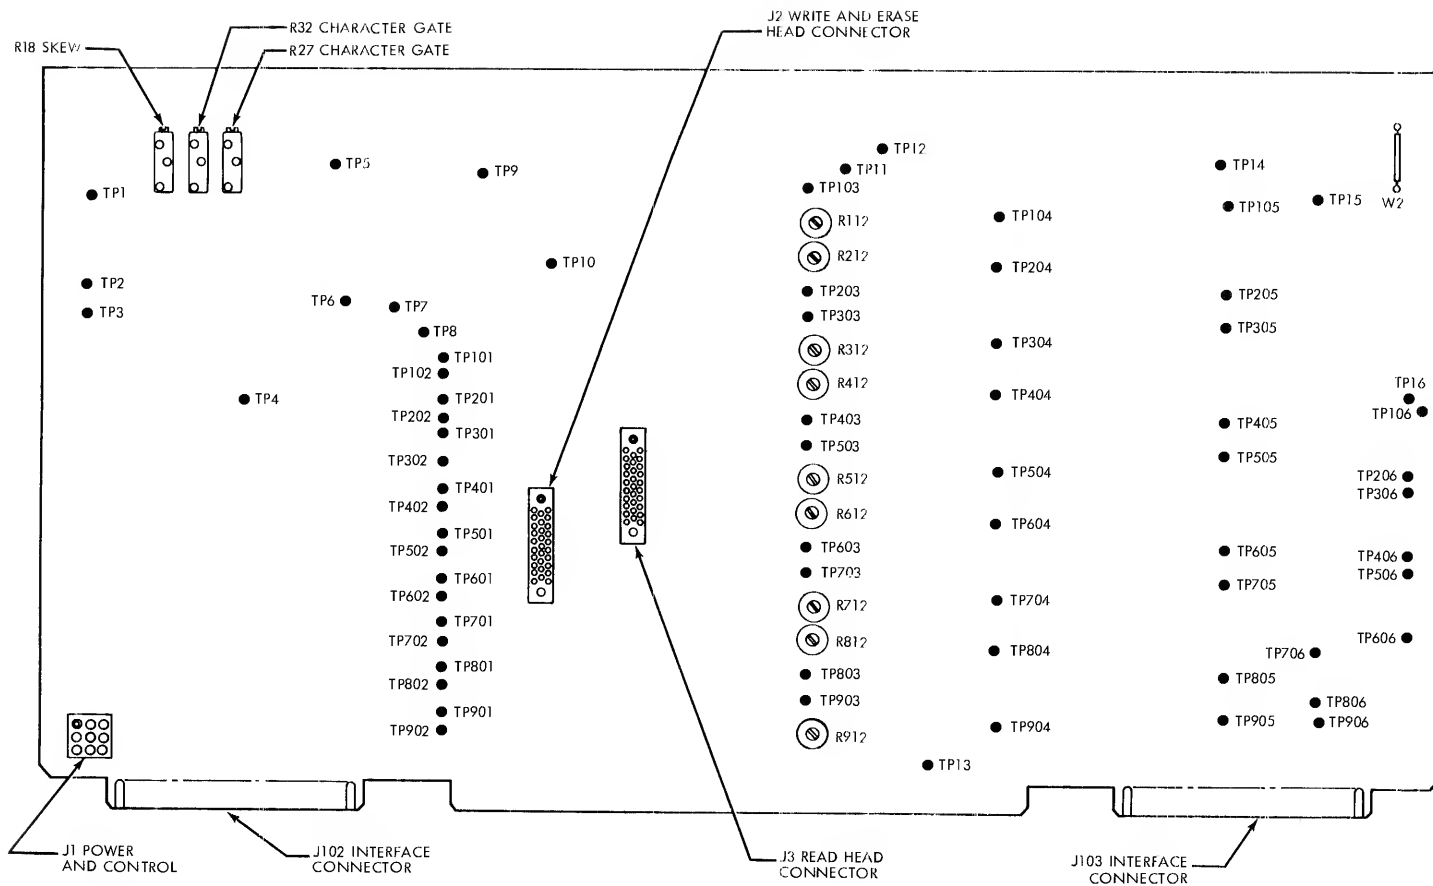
Data E9 PCBA, Test Point and Connector Placement
